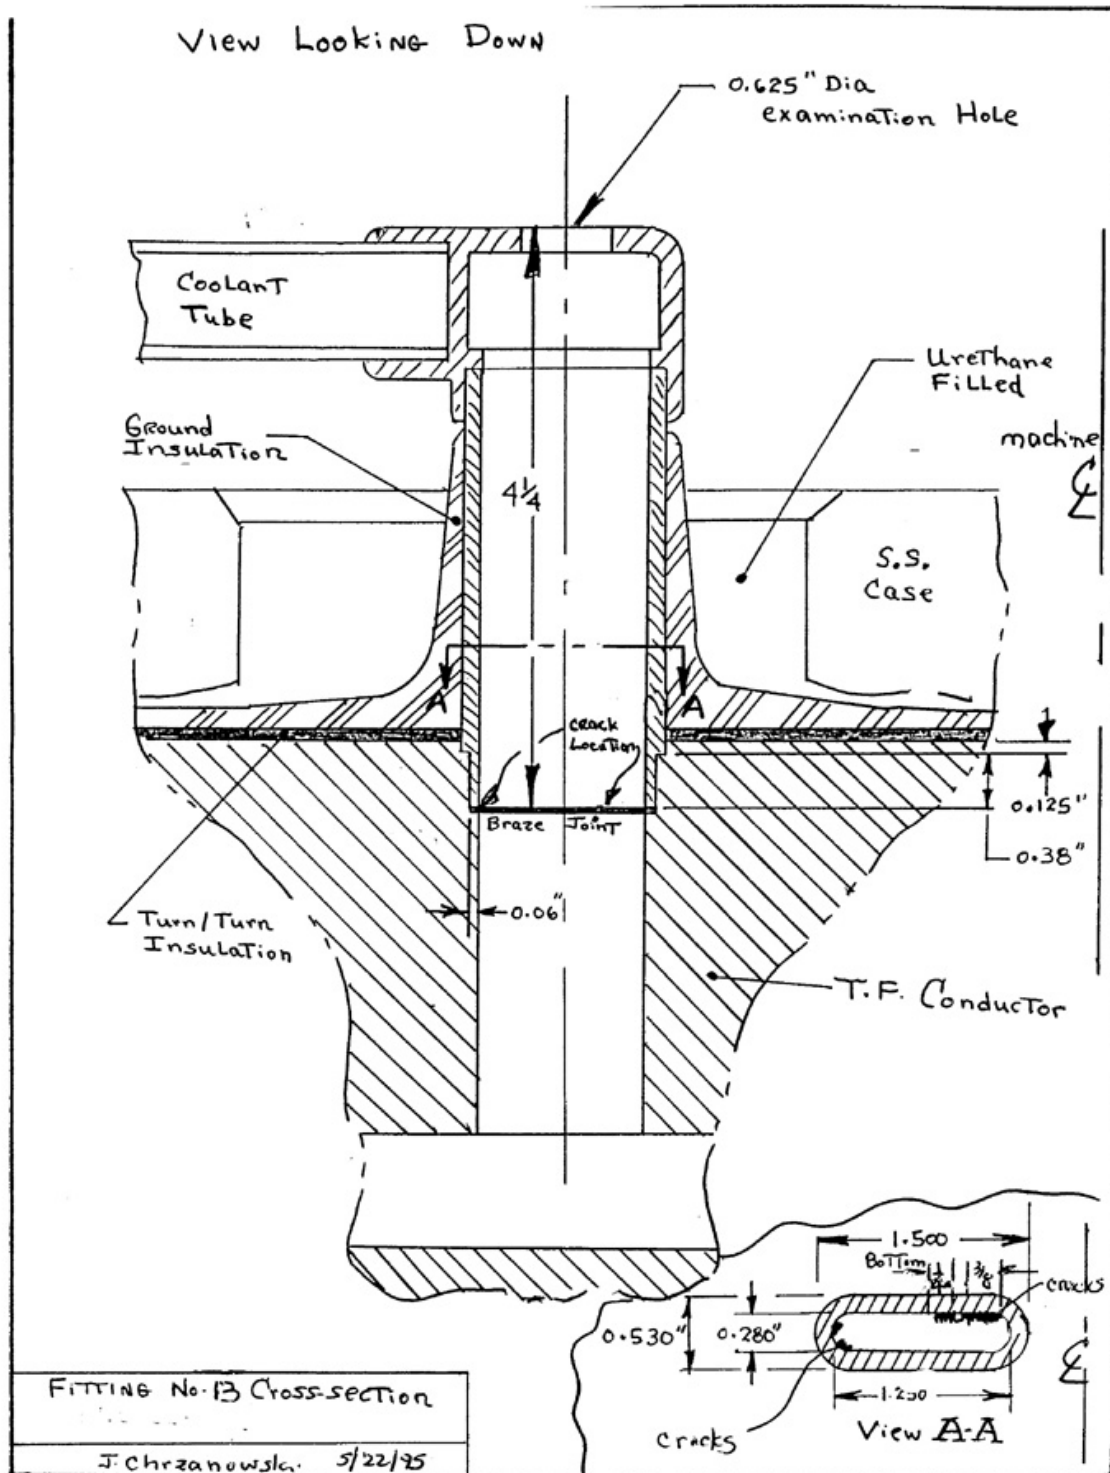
Schematic Detailing TF #3 Water Fitting Crack Observations
